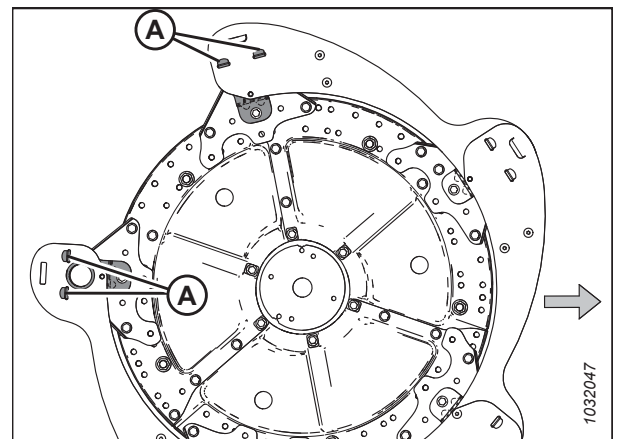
Reel Endshield Removed – Inboard Cam End
